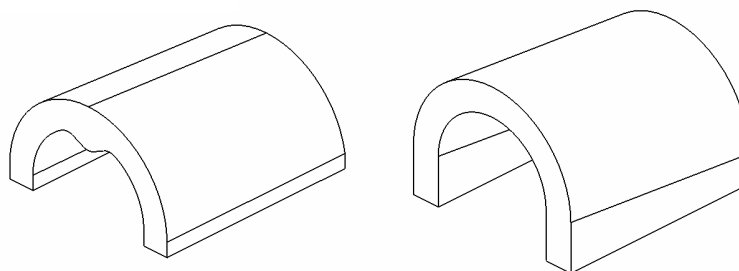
Disassembly of upper closing plate and turbulators insertion
